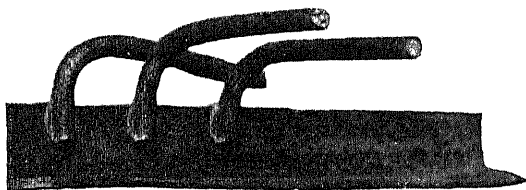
Straight Rods Spot-welded to Angle Iron and then Bent by Hammer Blows, the Angle Being Supported only by the Unwelded Flange.
